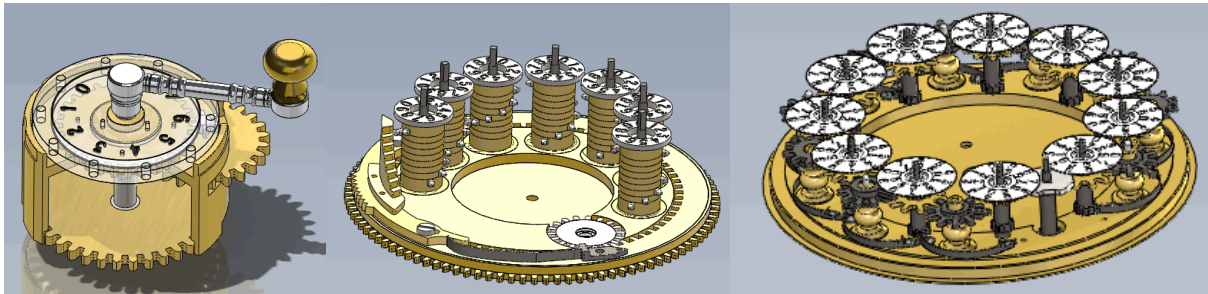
Inner, middle, outer assemblies of the BVM (left to right). These assemblies make up the internal working components of the machine.
